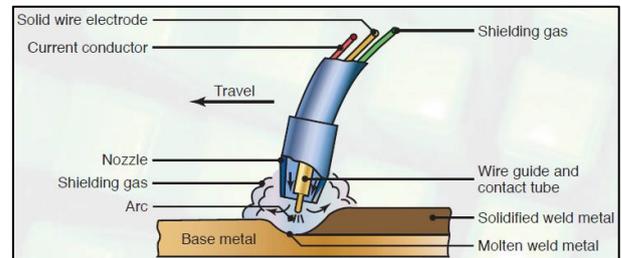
Schematic Diagram of GMAW Welding System
